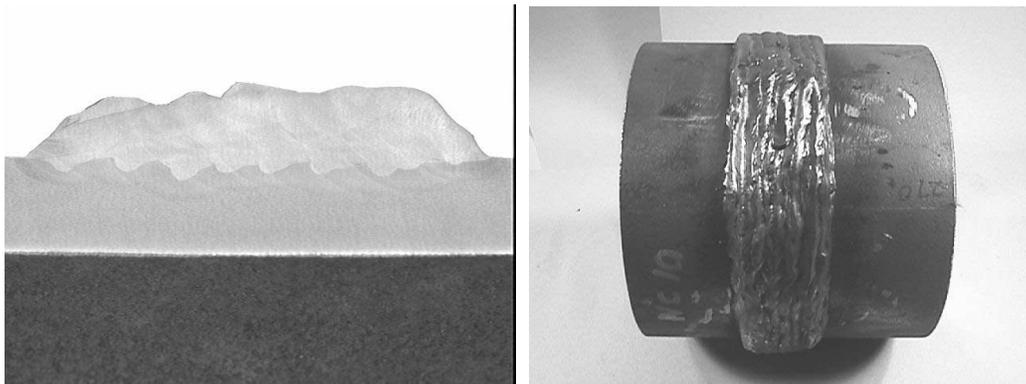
Overlay weld specimen with the GMAW process.
